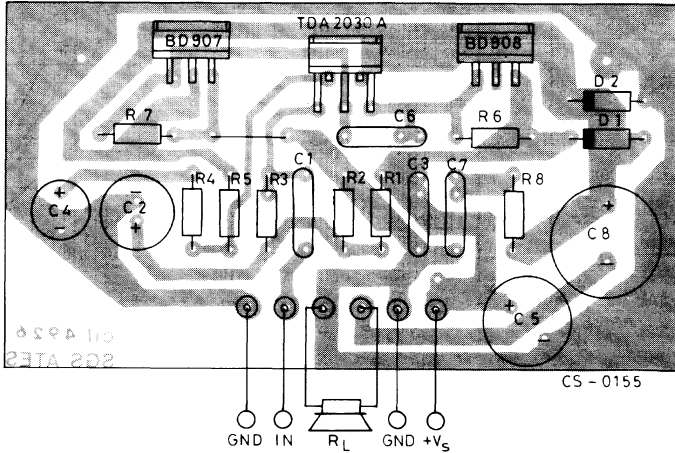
P.C. board and component layout for the circuit of fig. 8 (1:1 scale)
